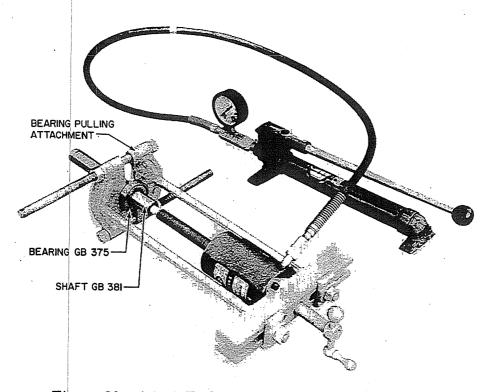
1 to 1 Shaft, Removal of Bearing GB375
